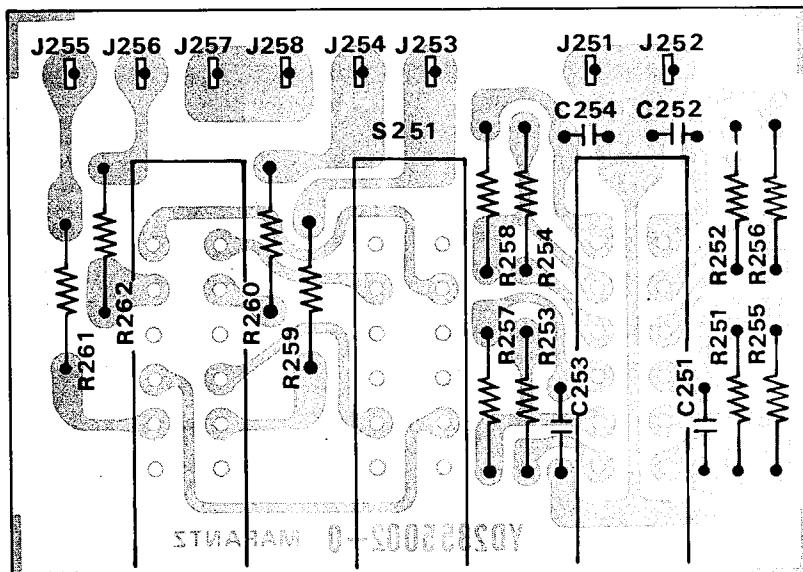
Tape Mon., Hi Filter Unit Assembly P250 Component Locations
